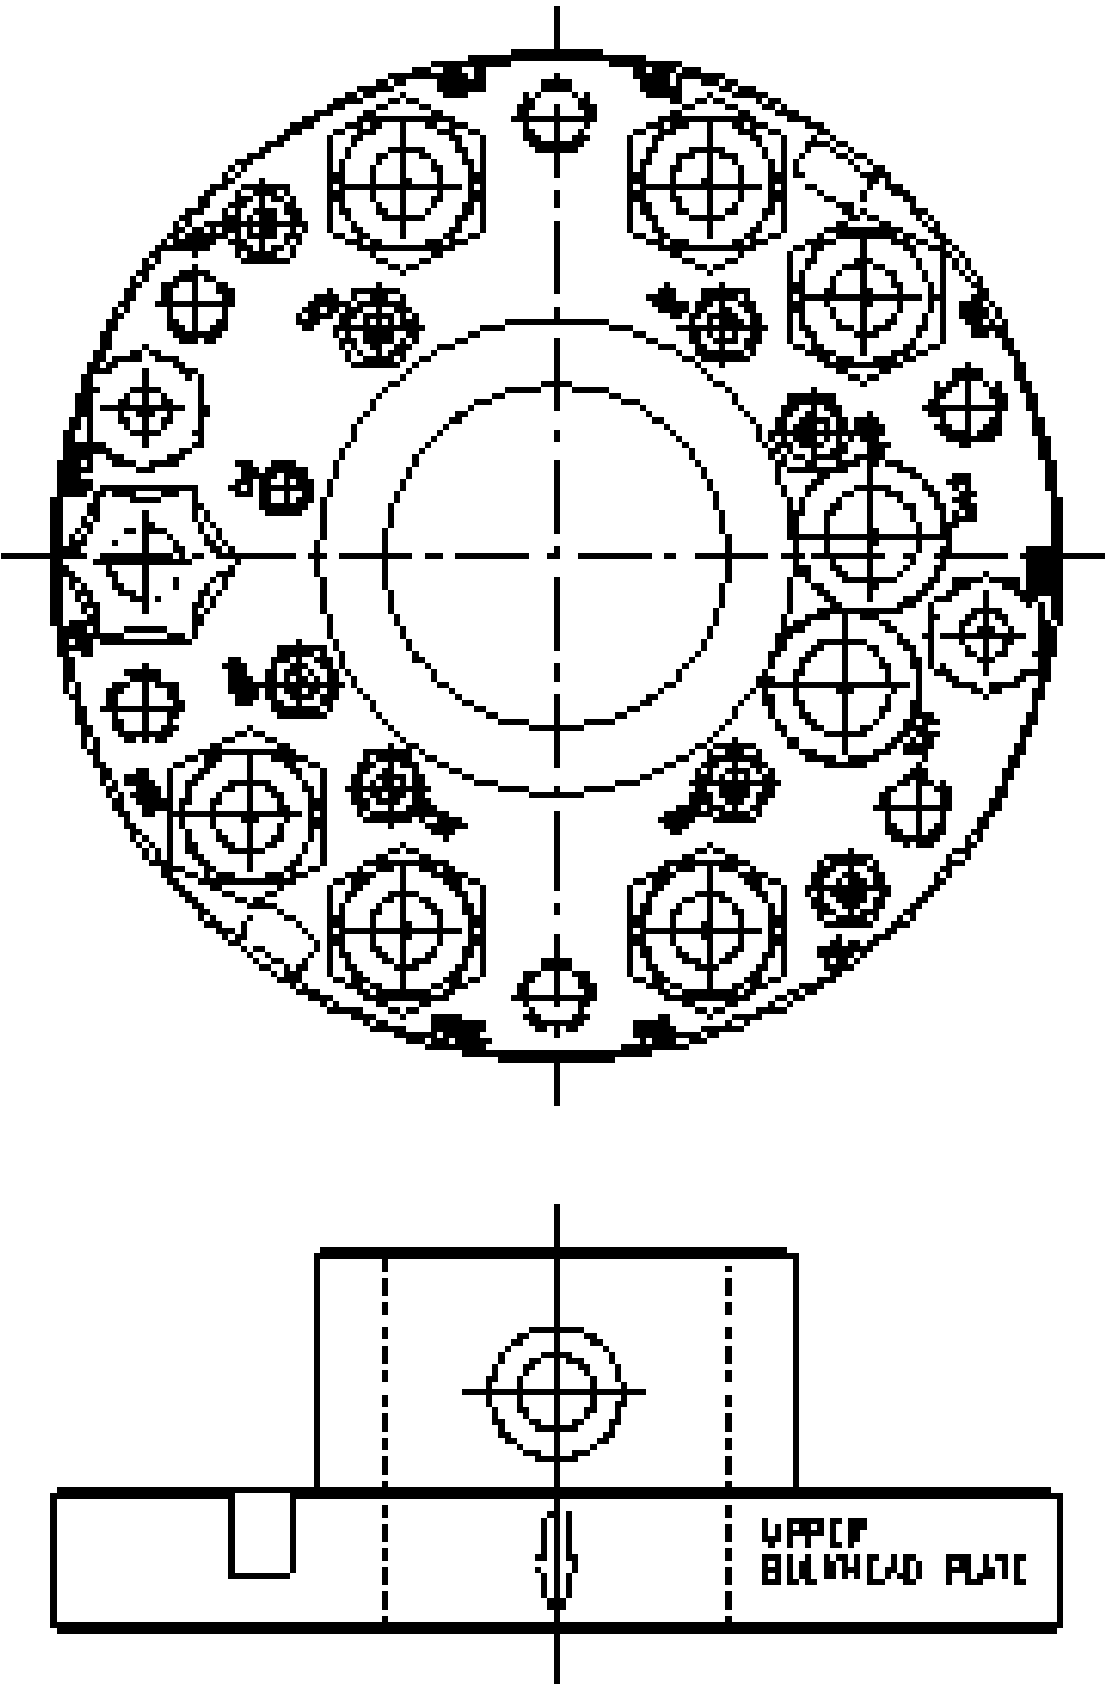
Upper Turbodisk 2 Bulkhead Plate (Reference Figure 26)
